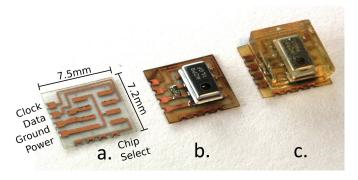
Single sensor unit; a. Blank FR4 PCB, b. Barometer and a capacitor soldered, c. Cast in rubber
